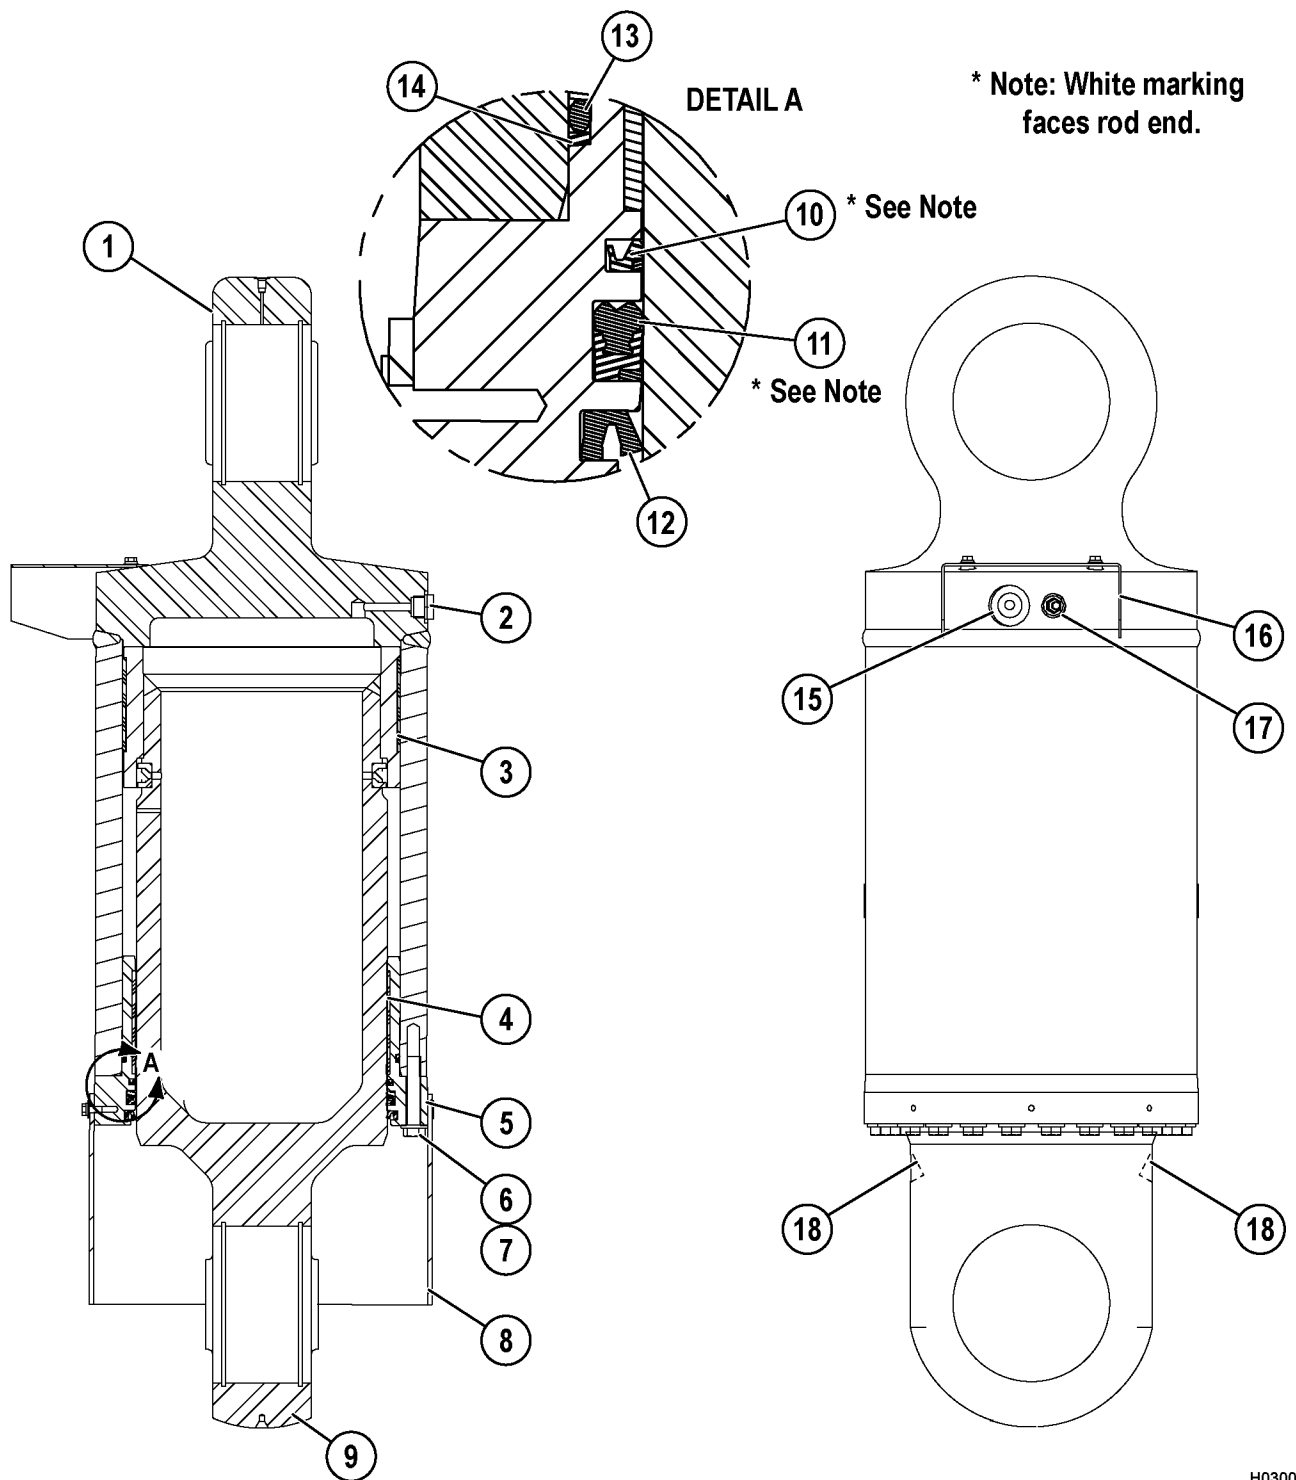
REAR SUSPENSION ASSEMBLY
